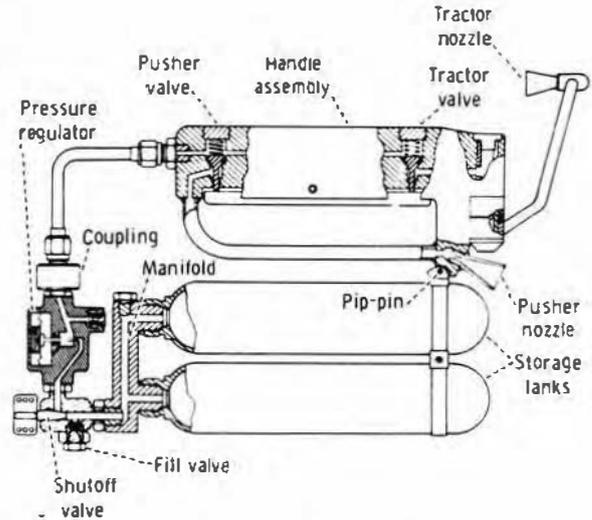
Cutaway drawing of Gemini IV Hand Held Maneuvering Unit.
